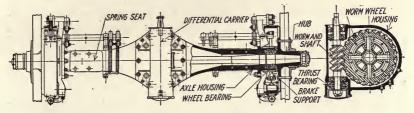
Sheldon Worm Drive Axle Semi-Floating Type.
